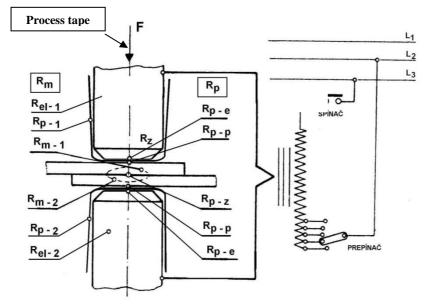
Scheme of DeltaSpot welding using process tape
